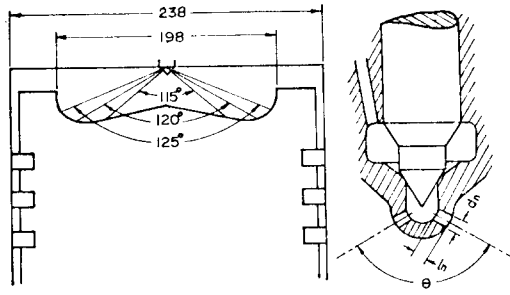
Sectional view of combustion chamber and nozzle in tested engine.
